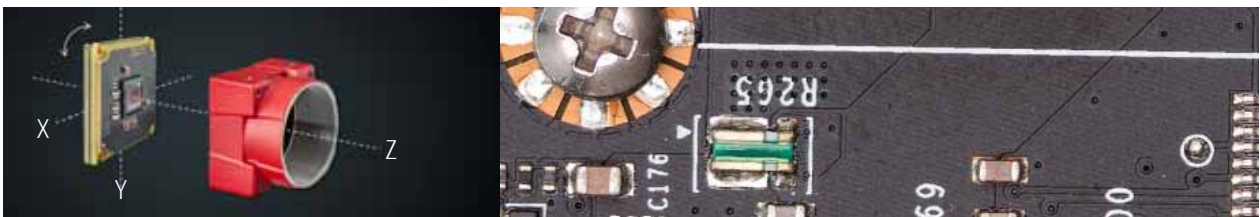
The sensor is twisted to the edge of the PCB (printed circuit board)
